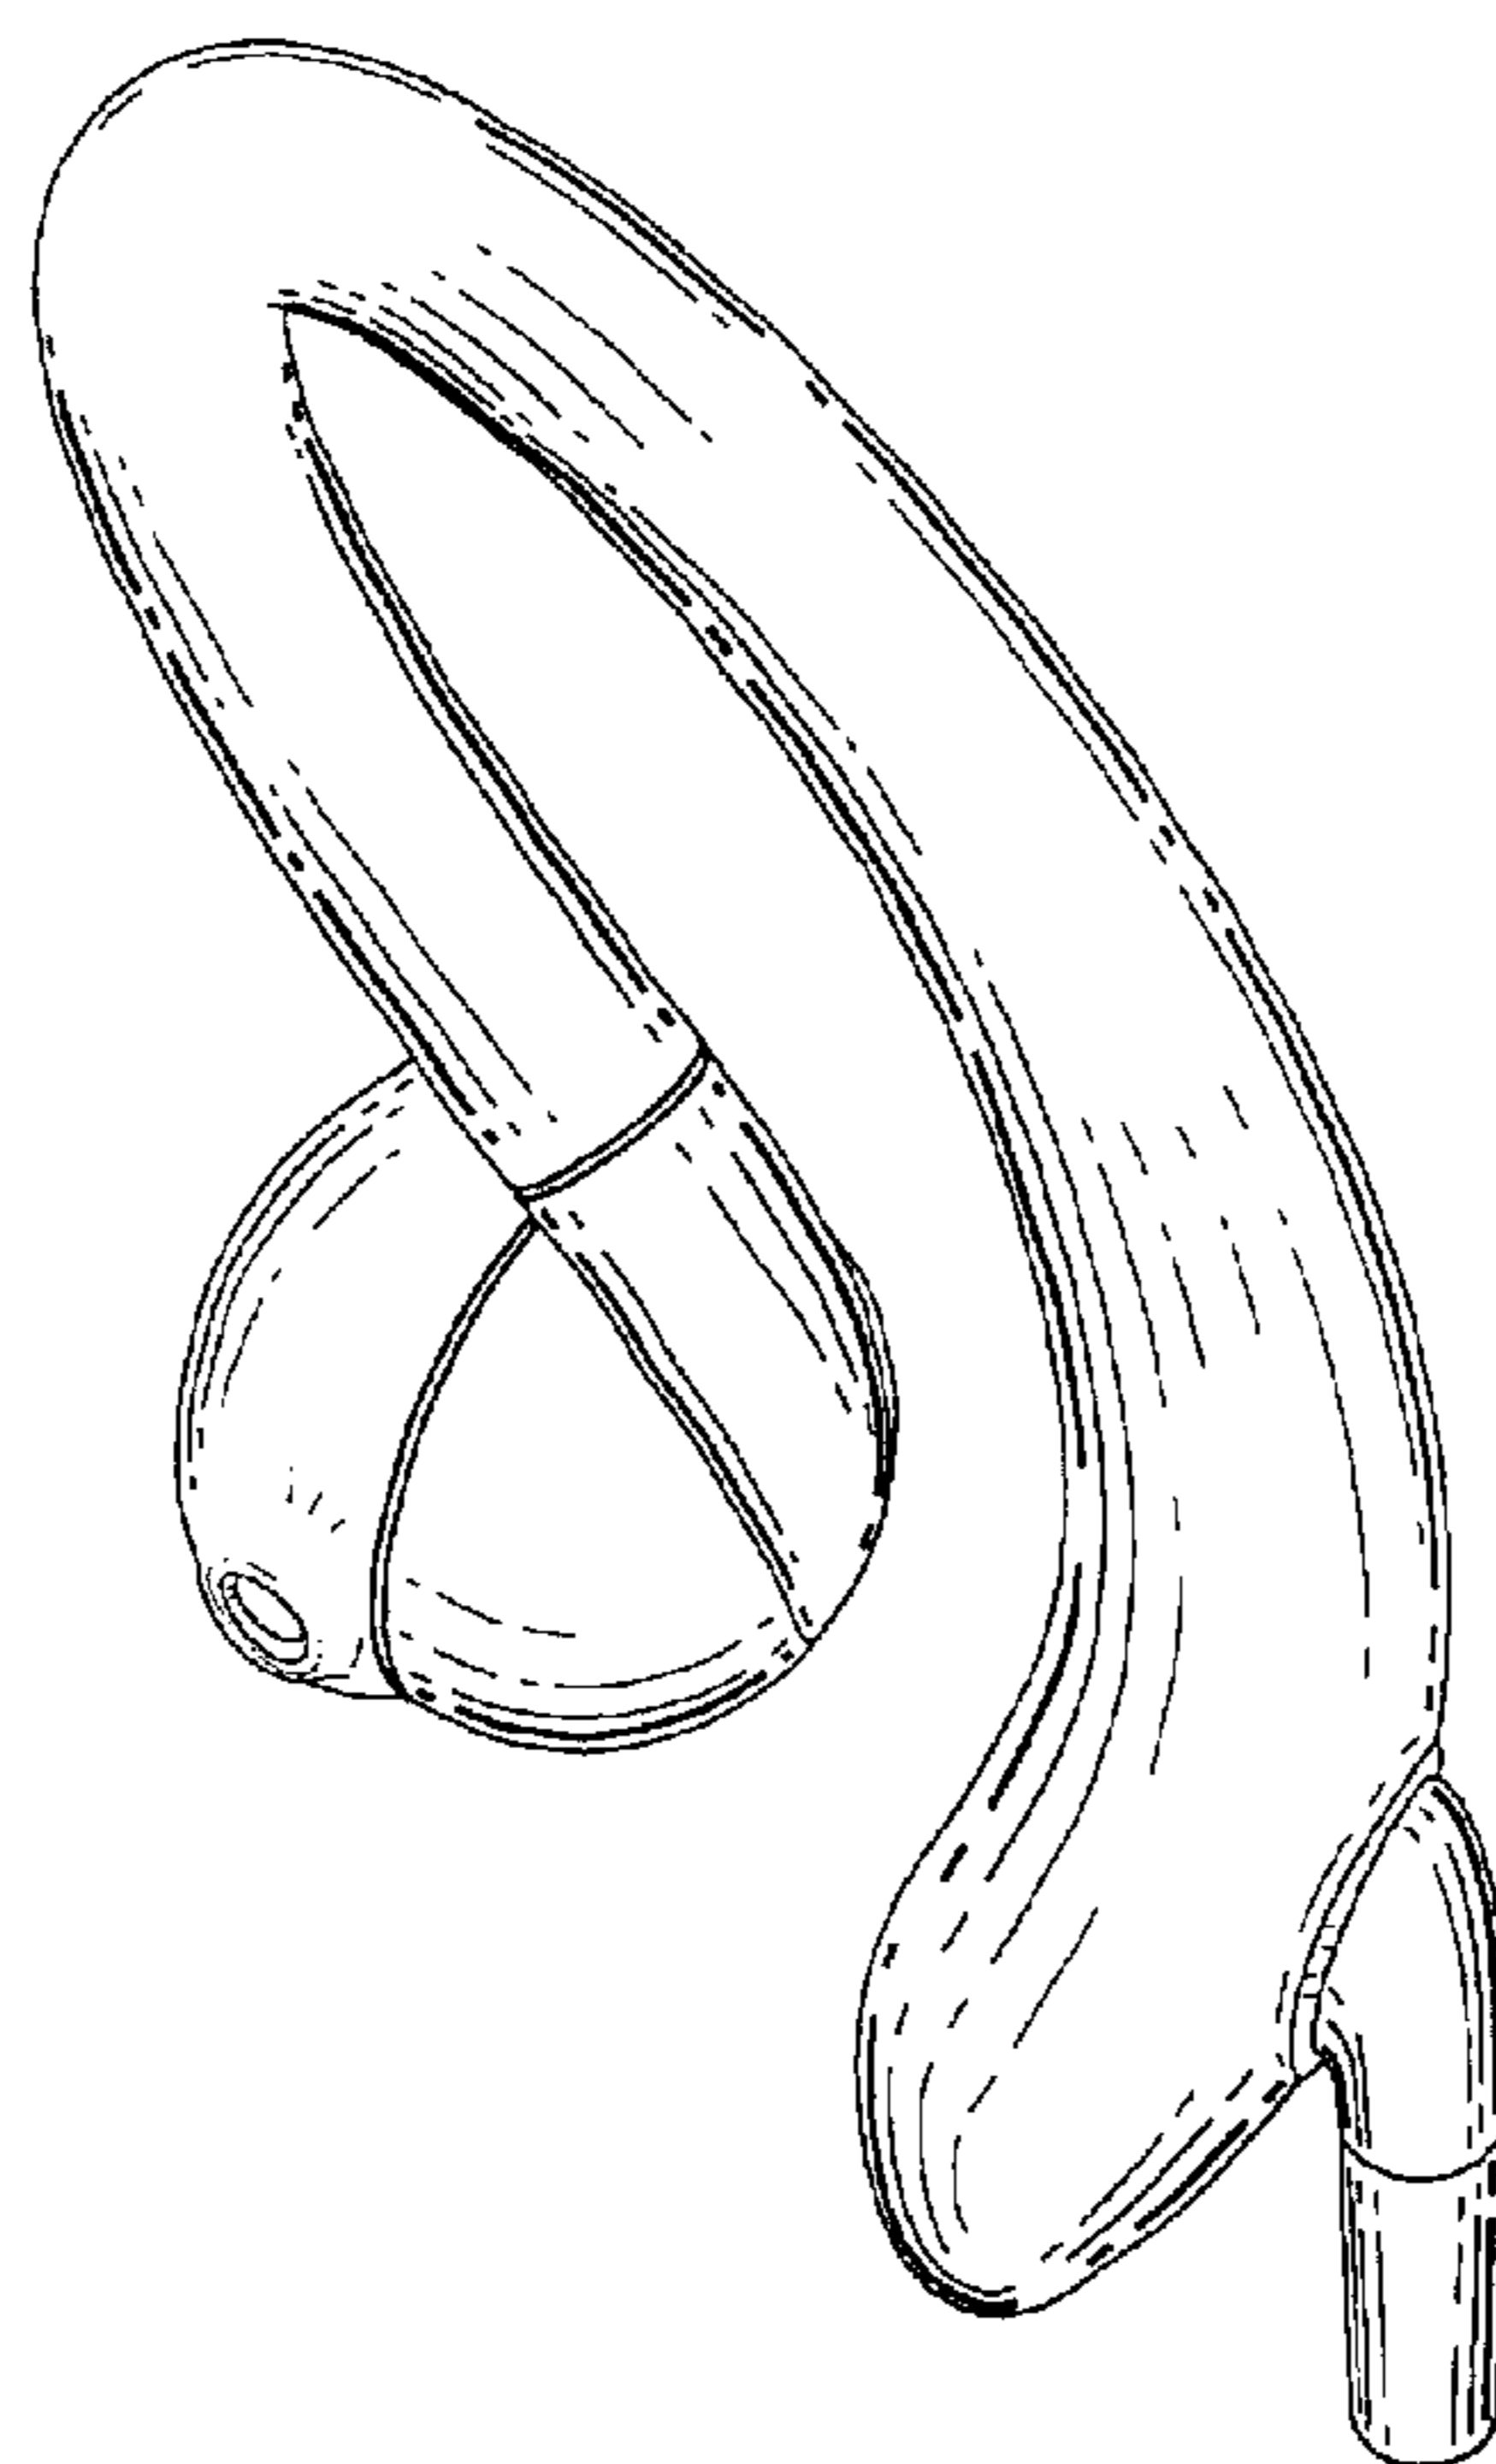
is a rear view of the communications earpiece shown in FIG. 1;
